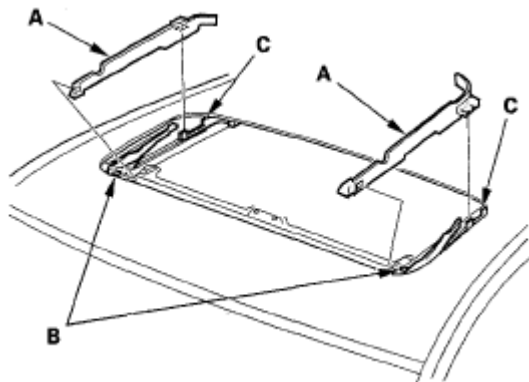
Identifying Drain Channel Rods, Glass Brackets And Drain Channel Sliders
